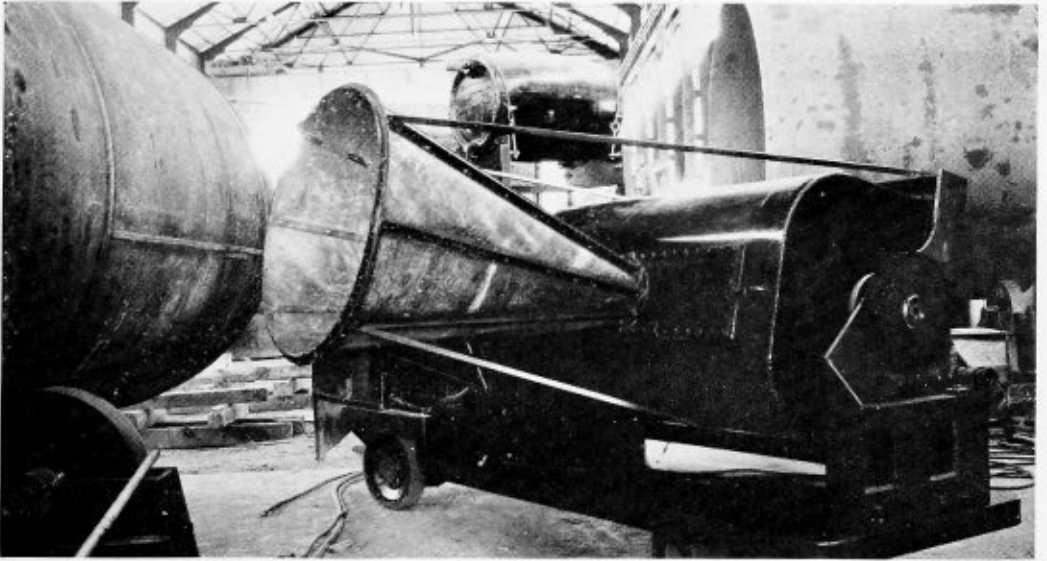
The same equipment, shown above, in use for the examination of a welded pipe section
